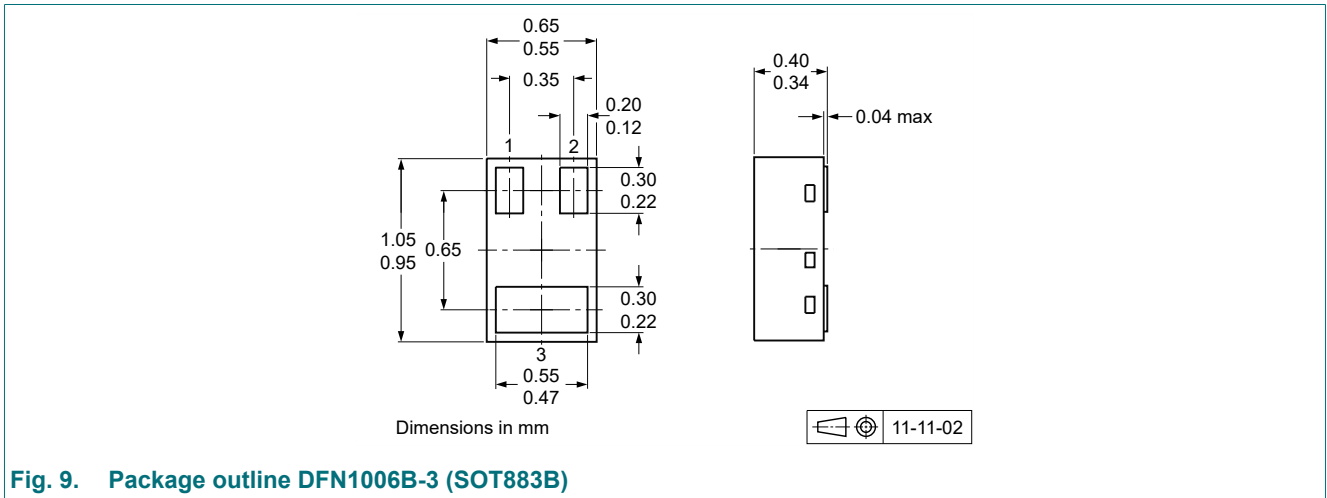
Package outline DFN1006B-3 (SOT883B)
